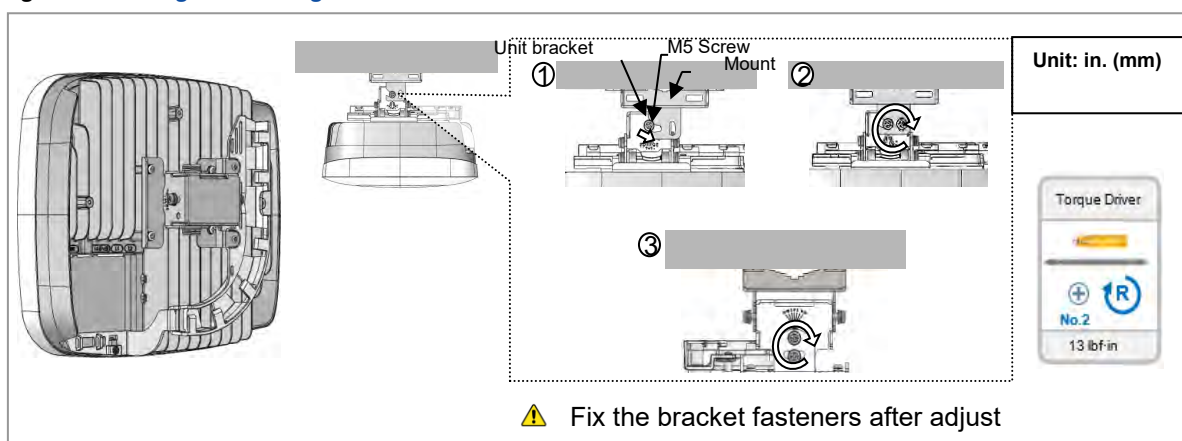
Fixing RU_Ceiling - Tilt Mount Kit
